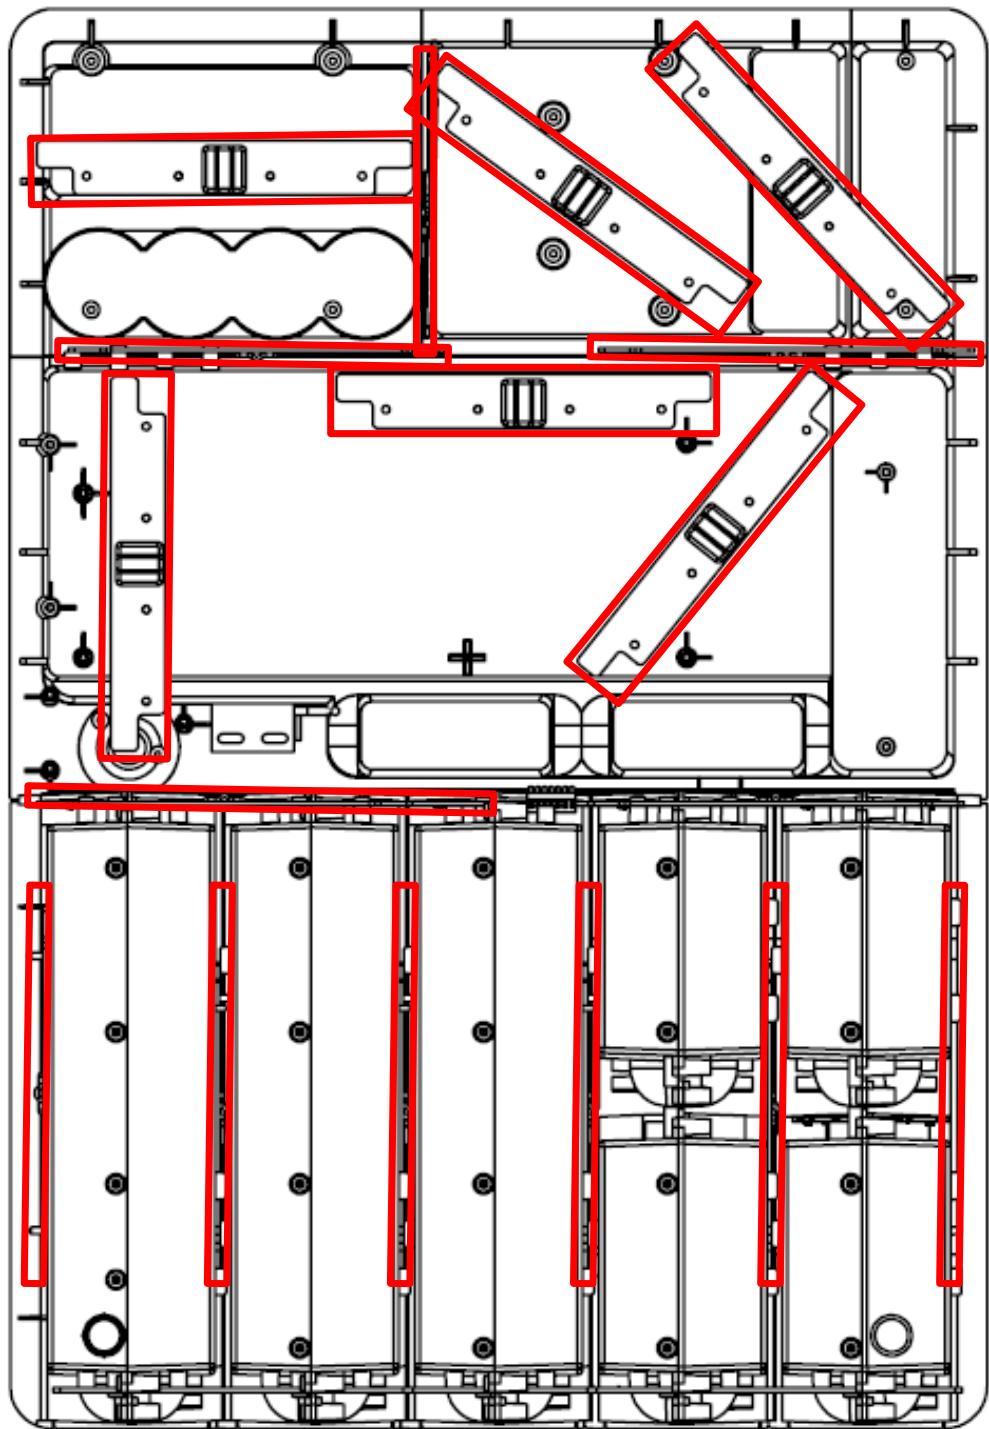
16x 21173 CMKE PCB Dipole Locations
